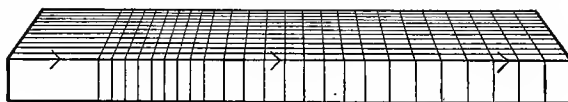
Problem No. 4 Marked Out Ready for Sawing
